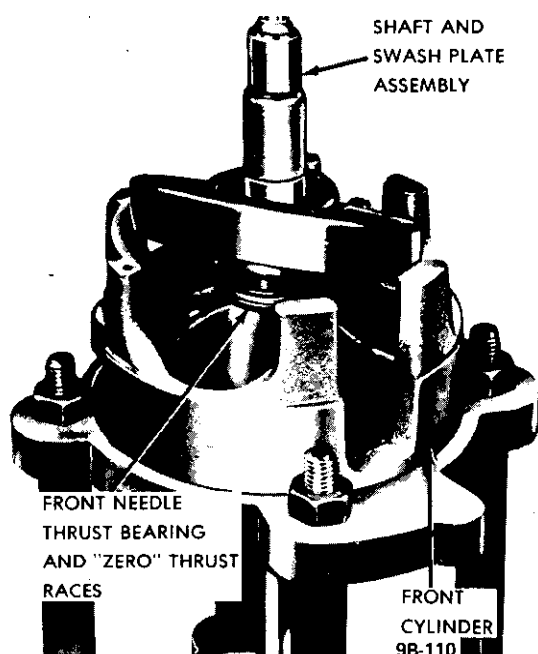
B-137 Shaft and Front Needle Thrust Bearing in Cylinder Half
